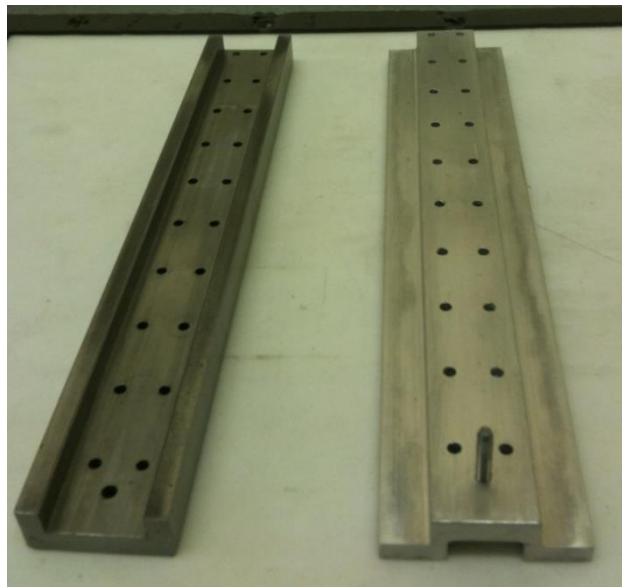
Hole drilling and assembly jig for pop riveted strips
